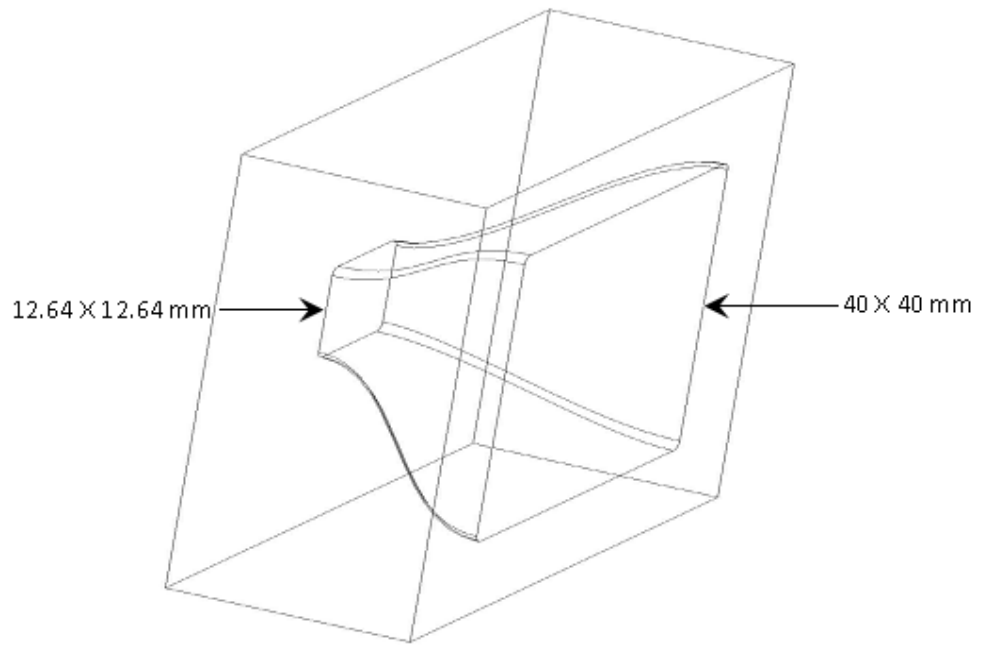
(b) The dimension of extrusion die of 90% reduction of cosine die.
